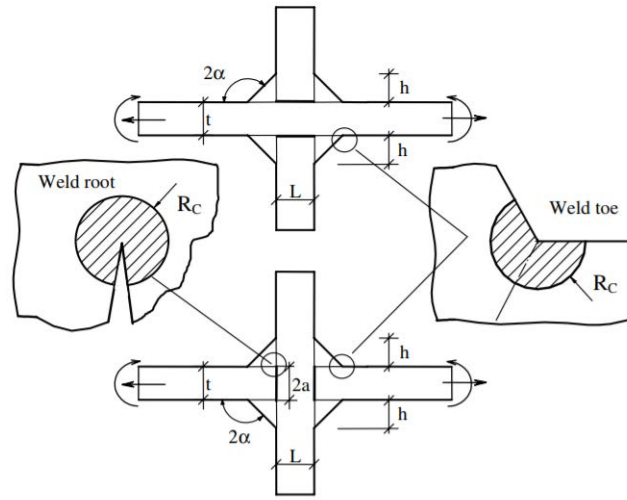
Examples of control volume at both weld toe and weld root
